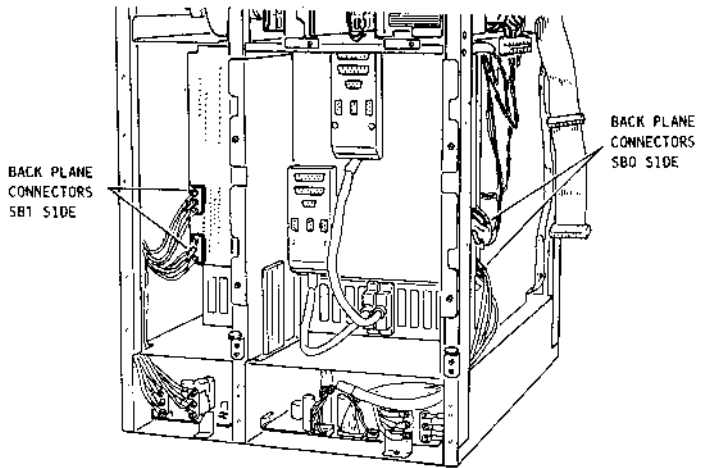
Position of BACK PLANE Connectors on System Frame
